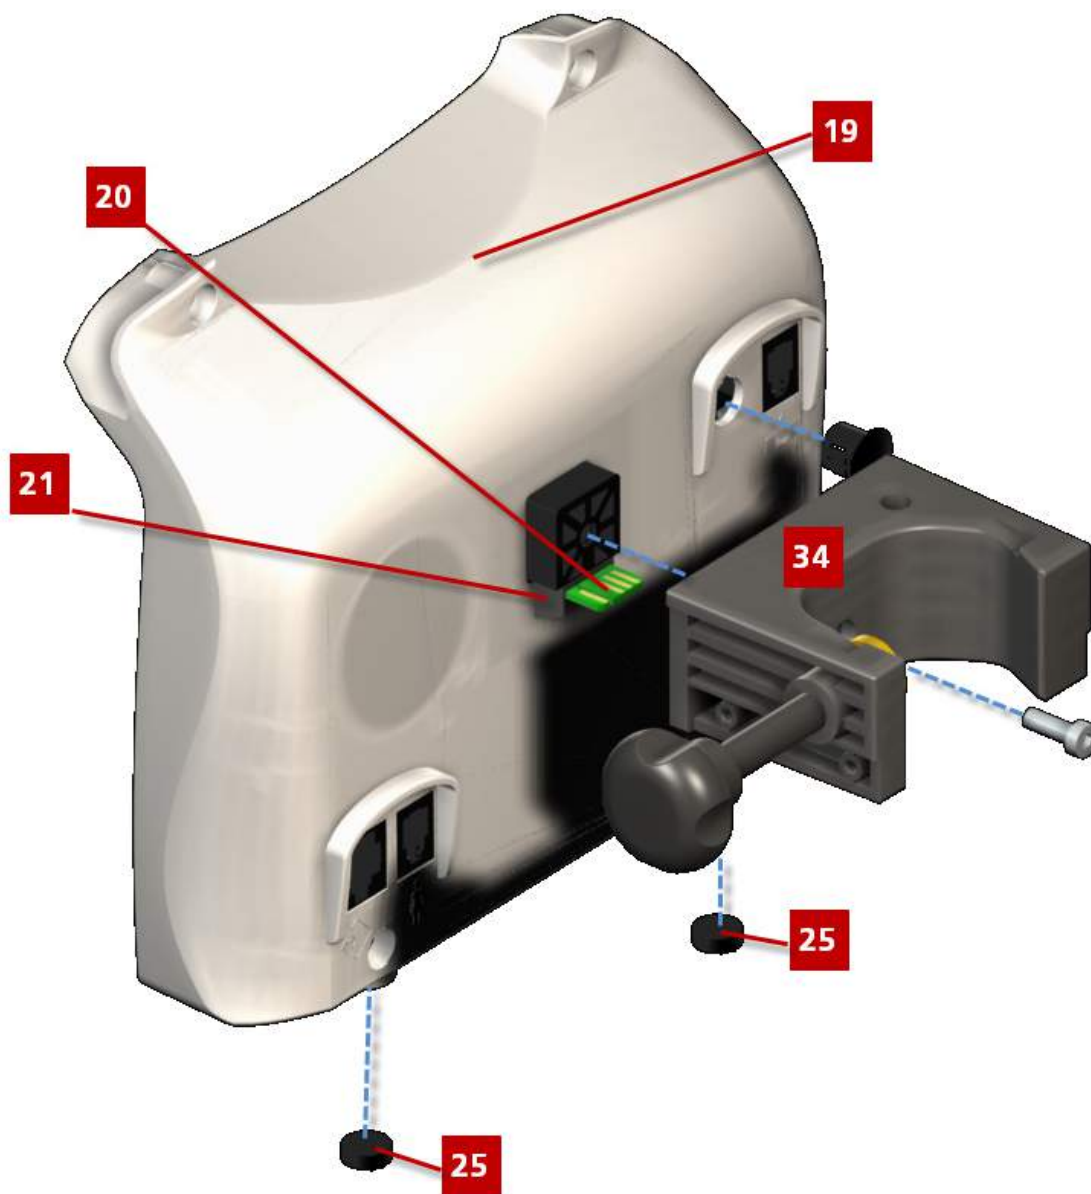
Exploded View ARGUS 71x V - Casing backside outside
